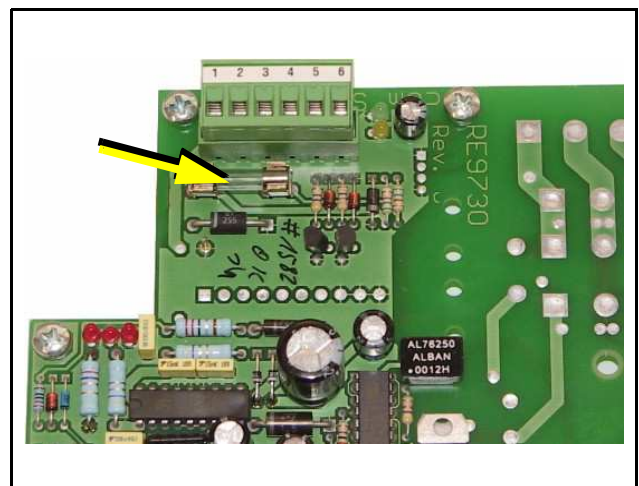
Fuse for the actuator at the remote control panel
